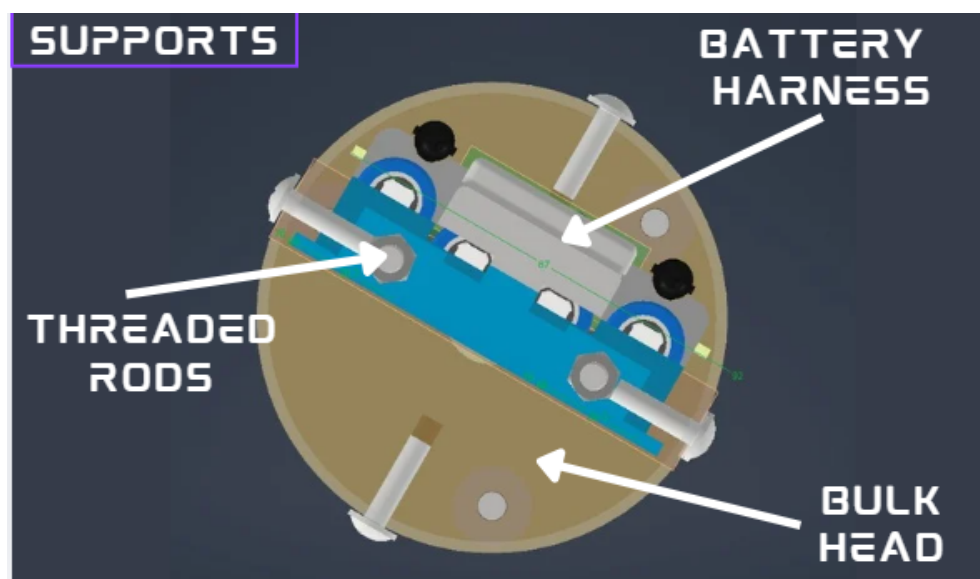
Labelled cross-sectional view of the avionics bay showing component stacking order, threaded-rod paths, and internal clearance zones. Authors' own CAD.
